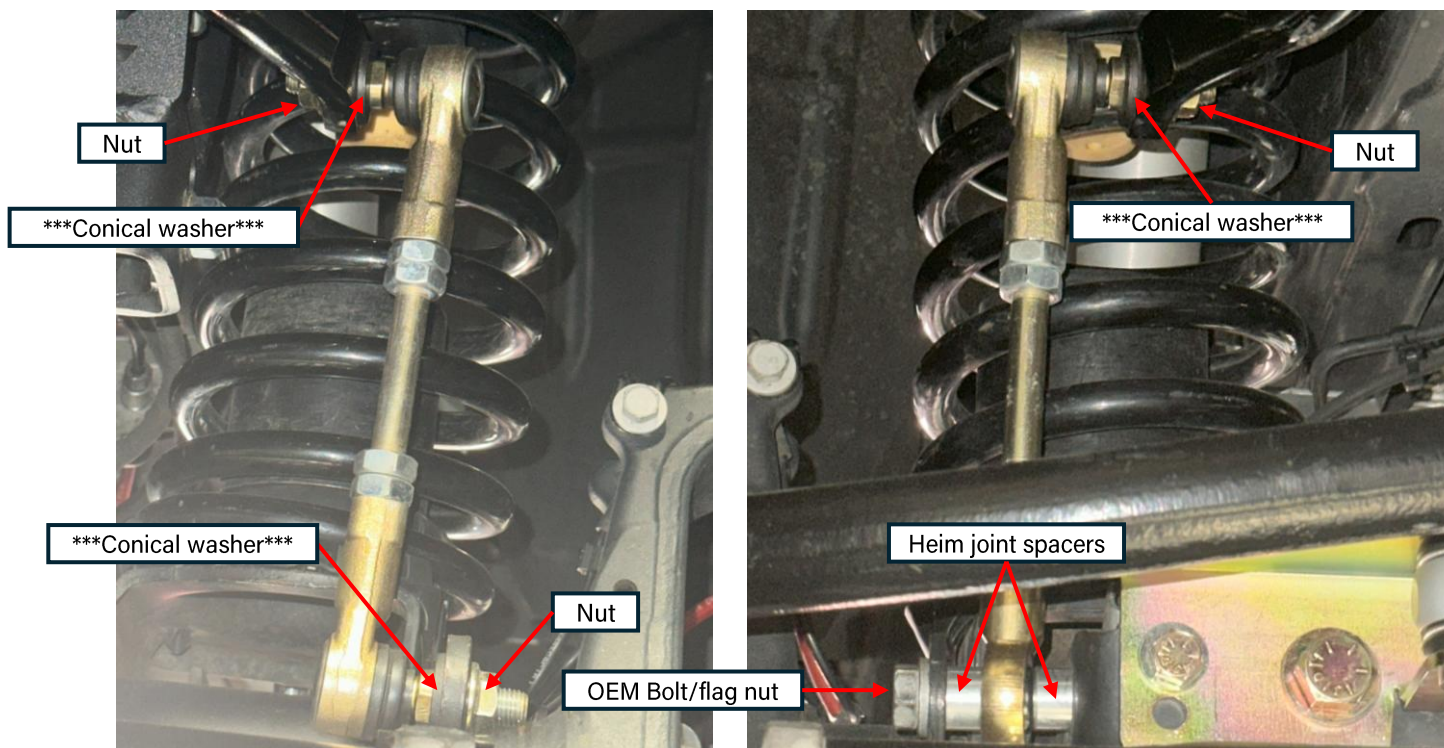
Front driver-side and passenger side sway bar end link proper orientation
